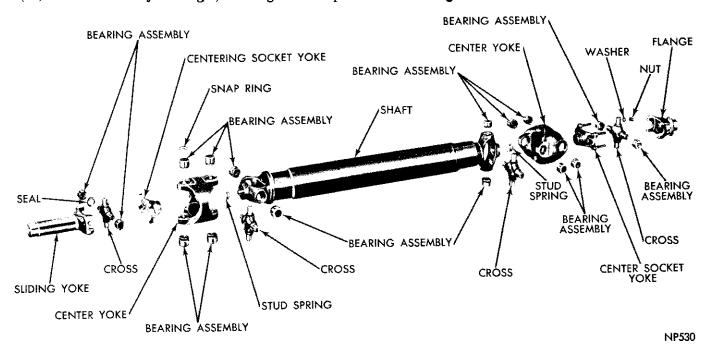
Propeller Shaft and Constant Velocity Universal Joints (Imperial)
